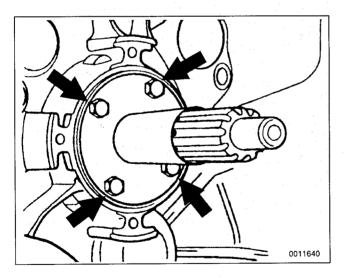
Clutch release bearing guide sleeve bolts. (Getrag transmission shown).
